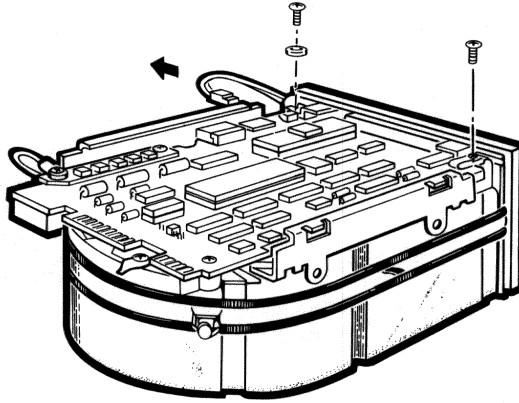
2-pin Connector and Screws Removal (RD52)
